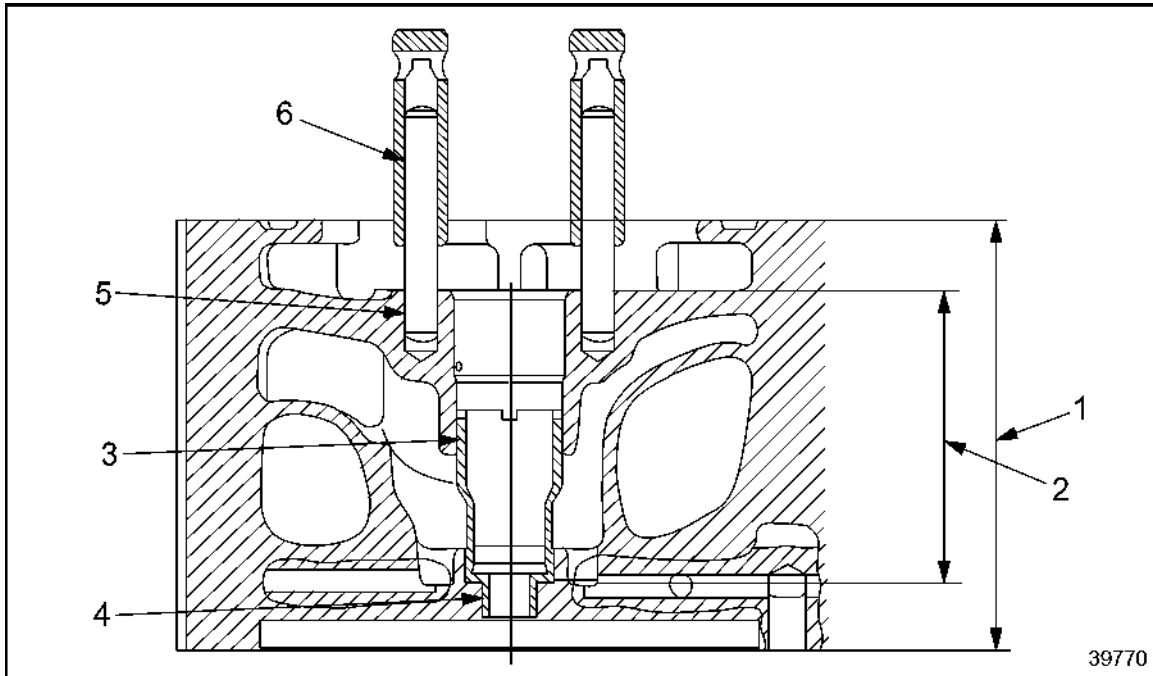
Cylinder Head — Mating Face — Protective Sleeve — Valve Bridge
